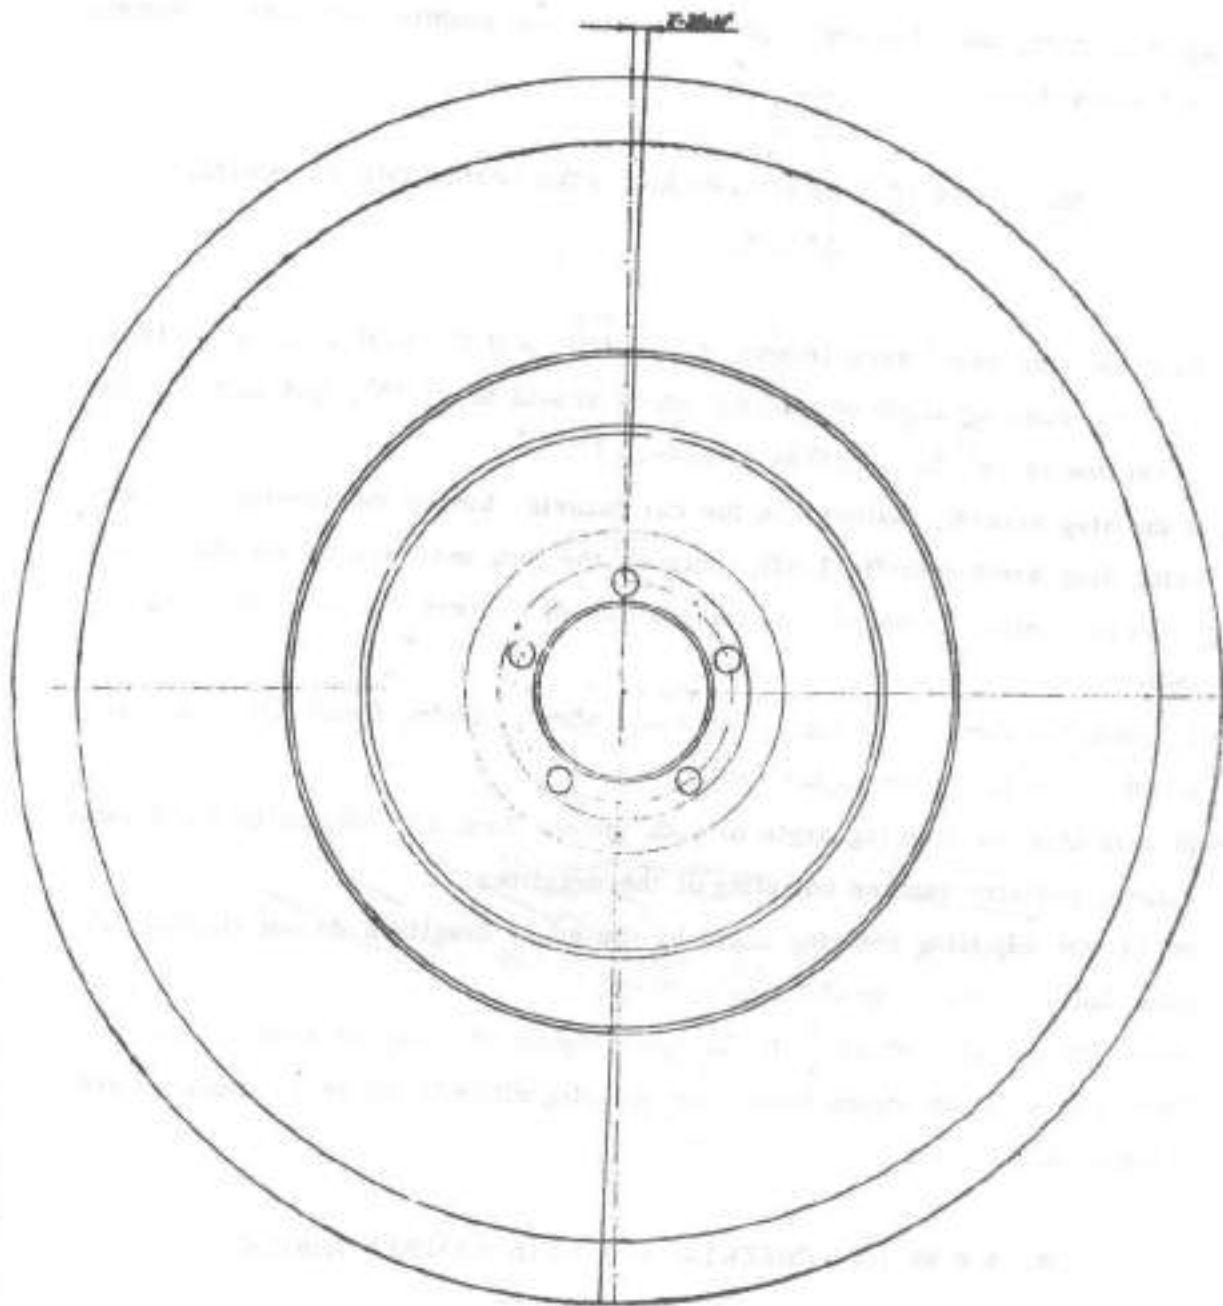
52. STEERING WHEEL CASTER ANGLE
